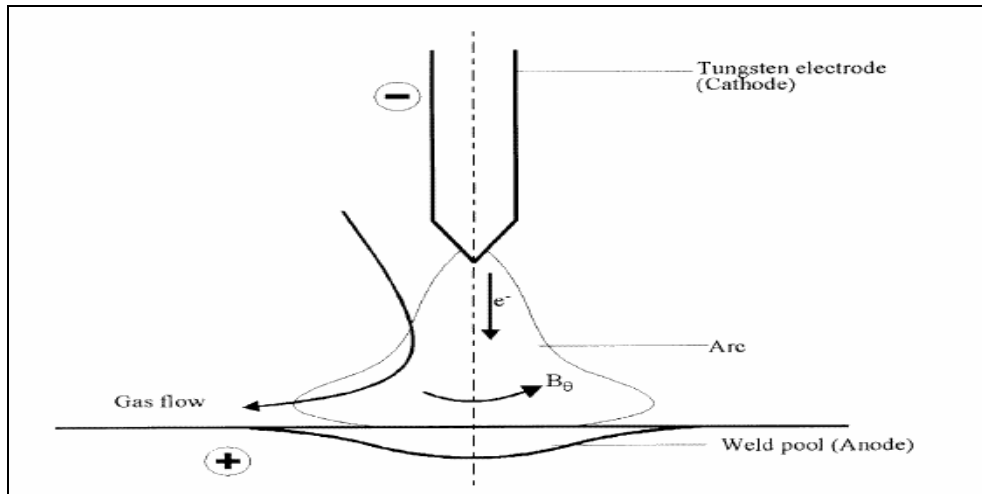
Schematic diagram of the welding arc (GTAW). [22]
